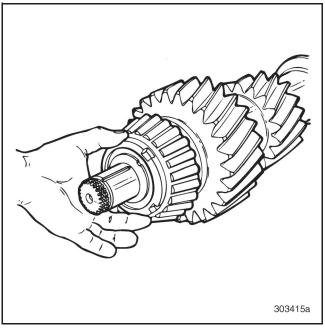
Loosely Installing Rear Bearing Cone Locknut
